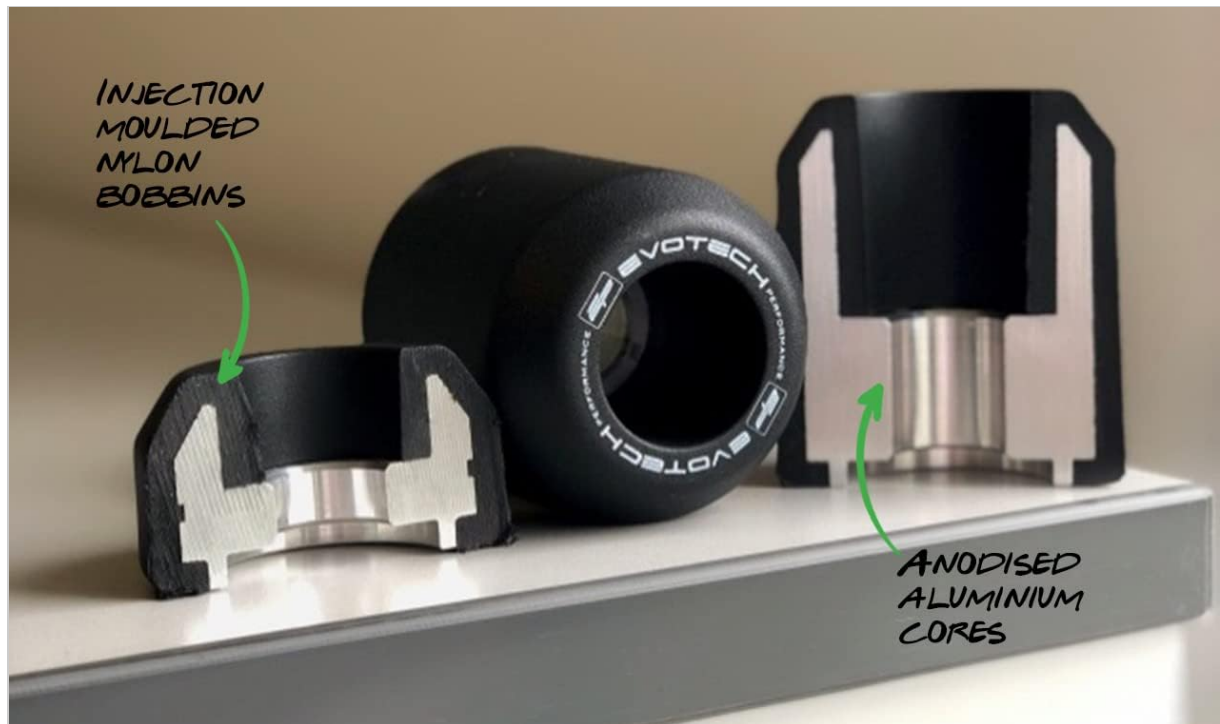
Exploded view of the crash protection components, highlighting the injection moulded nylon bobbins and anodised aluminium cores.
